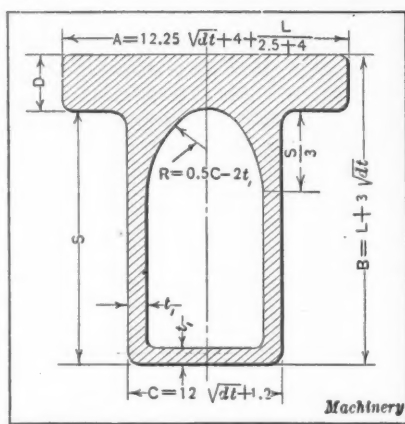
Frame Section widely adopted in Punching and Shearing Machines
